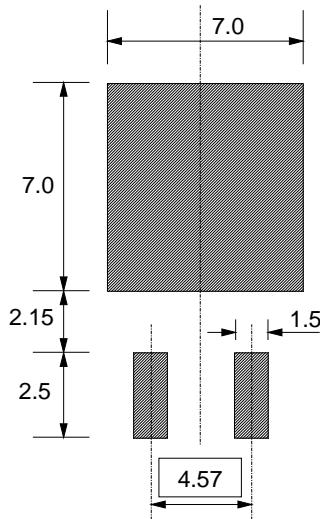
SOT428 : minimum pad sizes for surface mounting.
